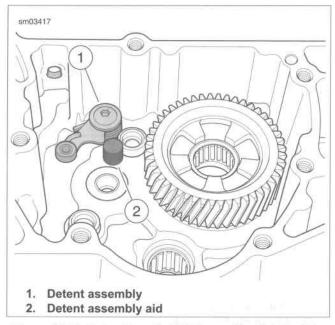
Using Gear Detent Assembly Aid (Part No. B-45520)
